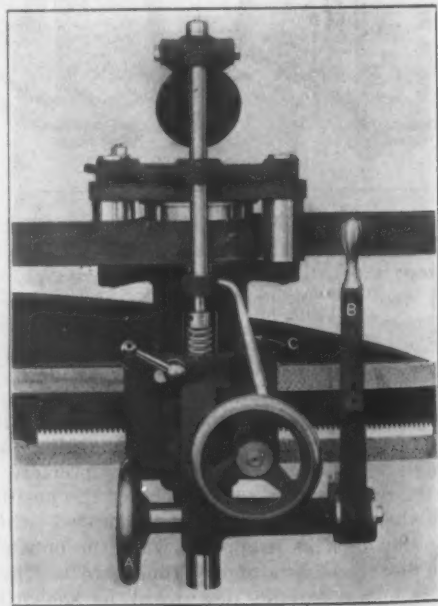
The Tapping Attachment Which Can Be Supplied for the Drill.
